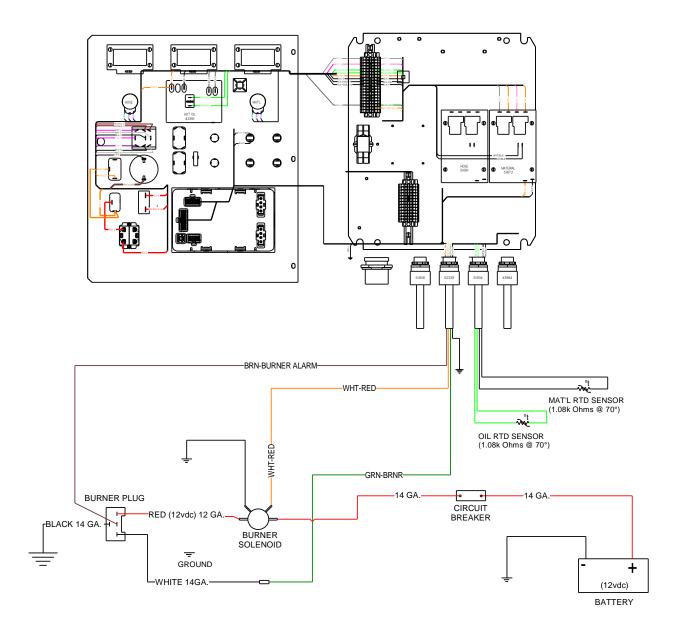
Diesel Burner Schematic – 3C Engine
